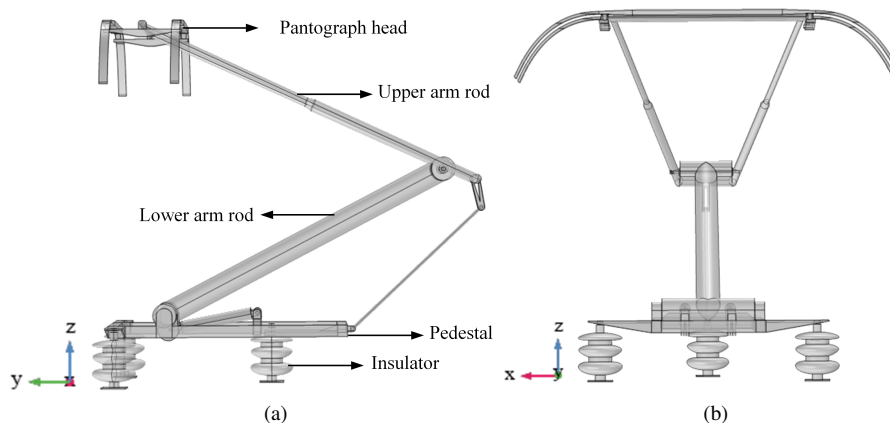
Assembly drawing of pantograph: side view of pantograph (a); front view of pantograph (b)
